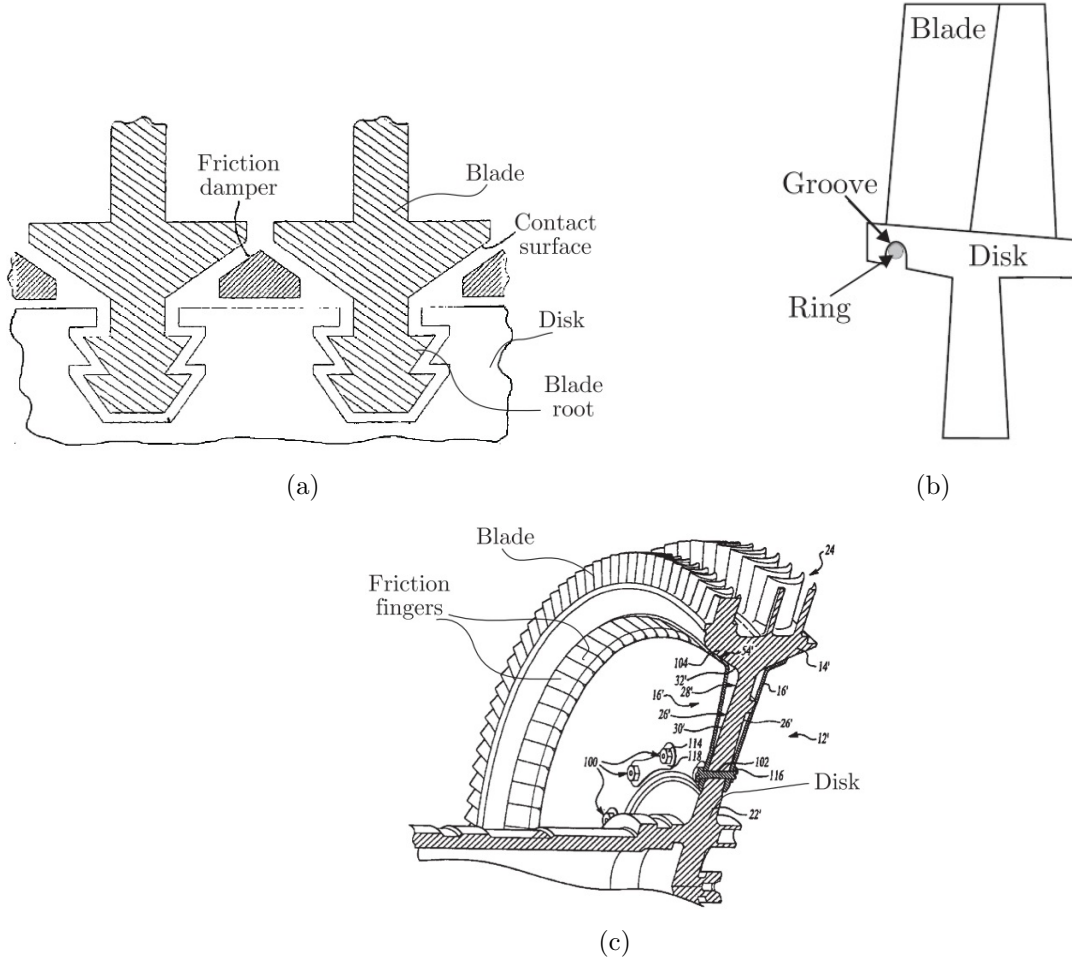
Friction damping technique for a) a non-monobloc bladed disk (at the root of blades) and for monobloc bladed disk: b) the friction ring device and c) the friction fingers mechanism
